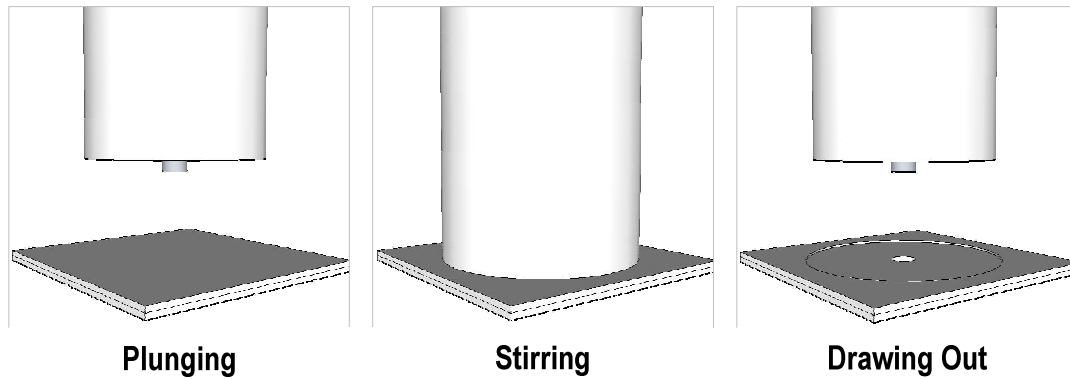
Visual schematic of the three-step friction stir spot welding (Adapted from Hovanski, Santellab & Grant, 2007, p2)
